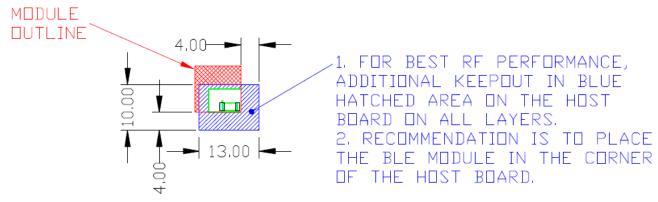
Recommended PCB Layout Pattern for CYBLE-222005-00
